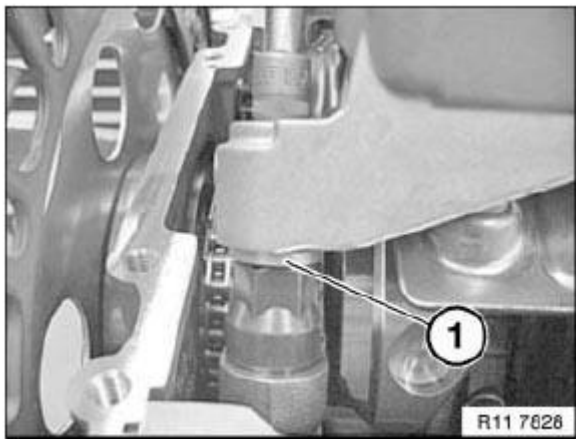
Identifying Oil Pump Adjusting Sleeve
